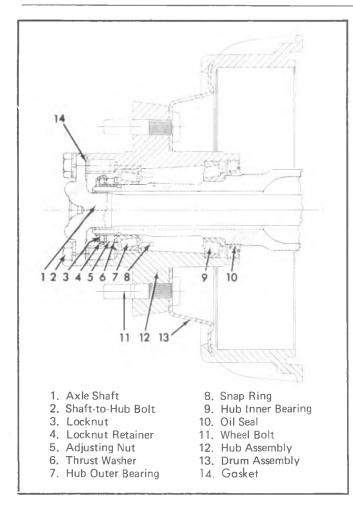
B-31-Hub and Drum Assembly-10-1/2" Axles
